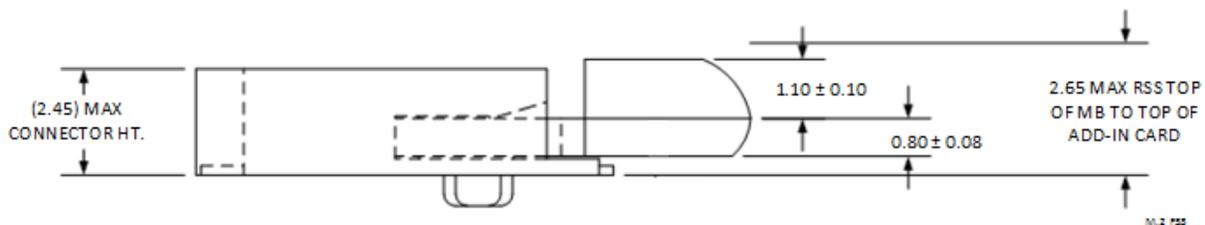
H2.5-S1 – Stack-up Top Mount Single-sided Add-in Card for 1.20 Maximum Top-side Component Height and with Higher Clearance above Motherboard
